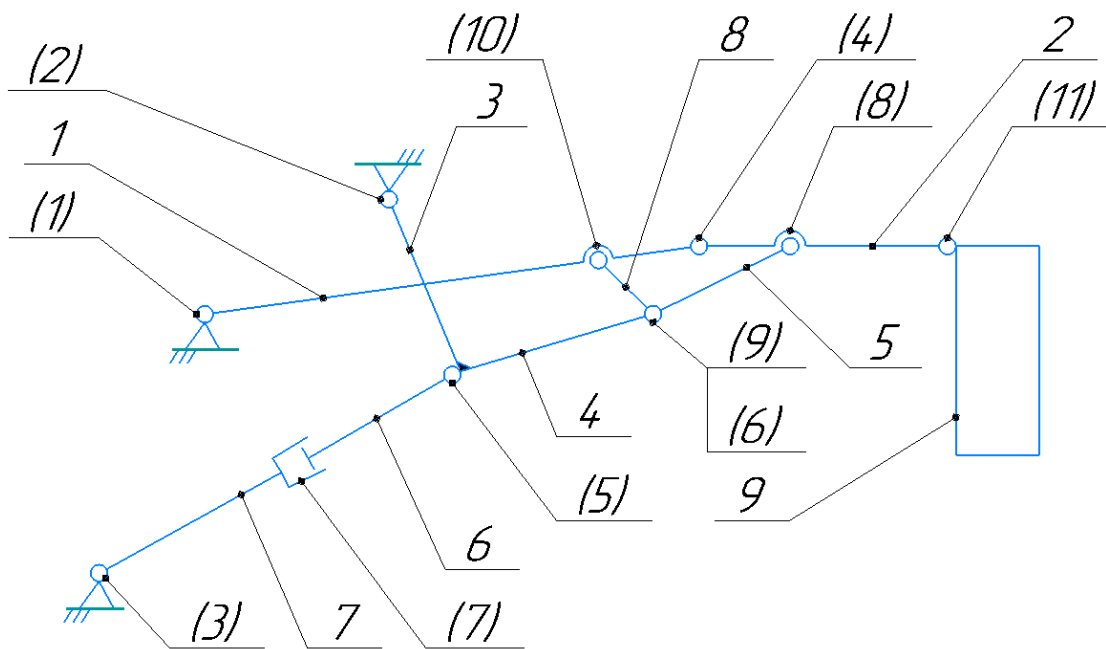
Kinematic scheme of “3-Joint” mechanism.
